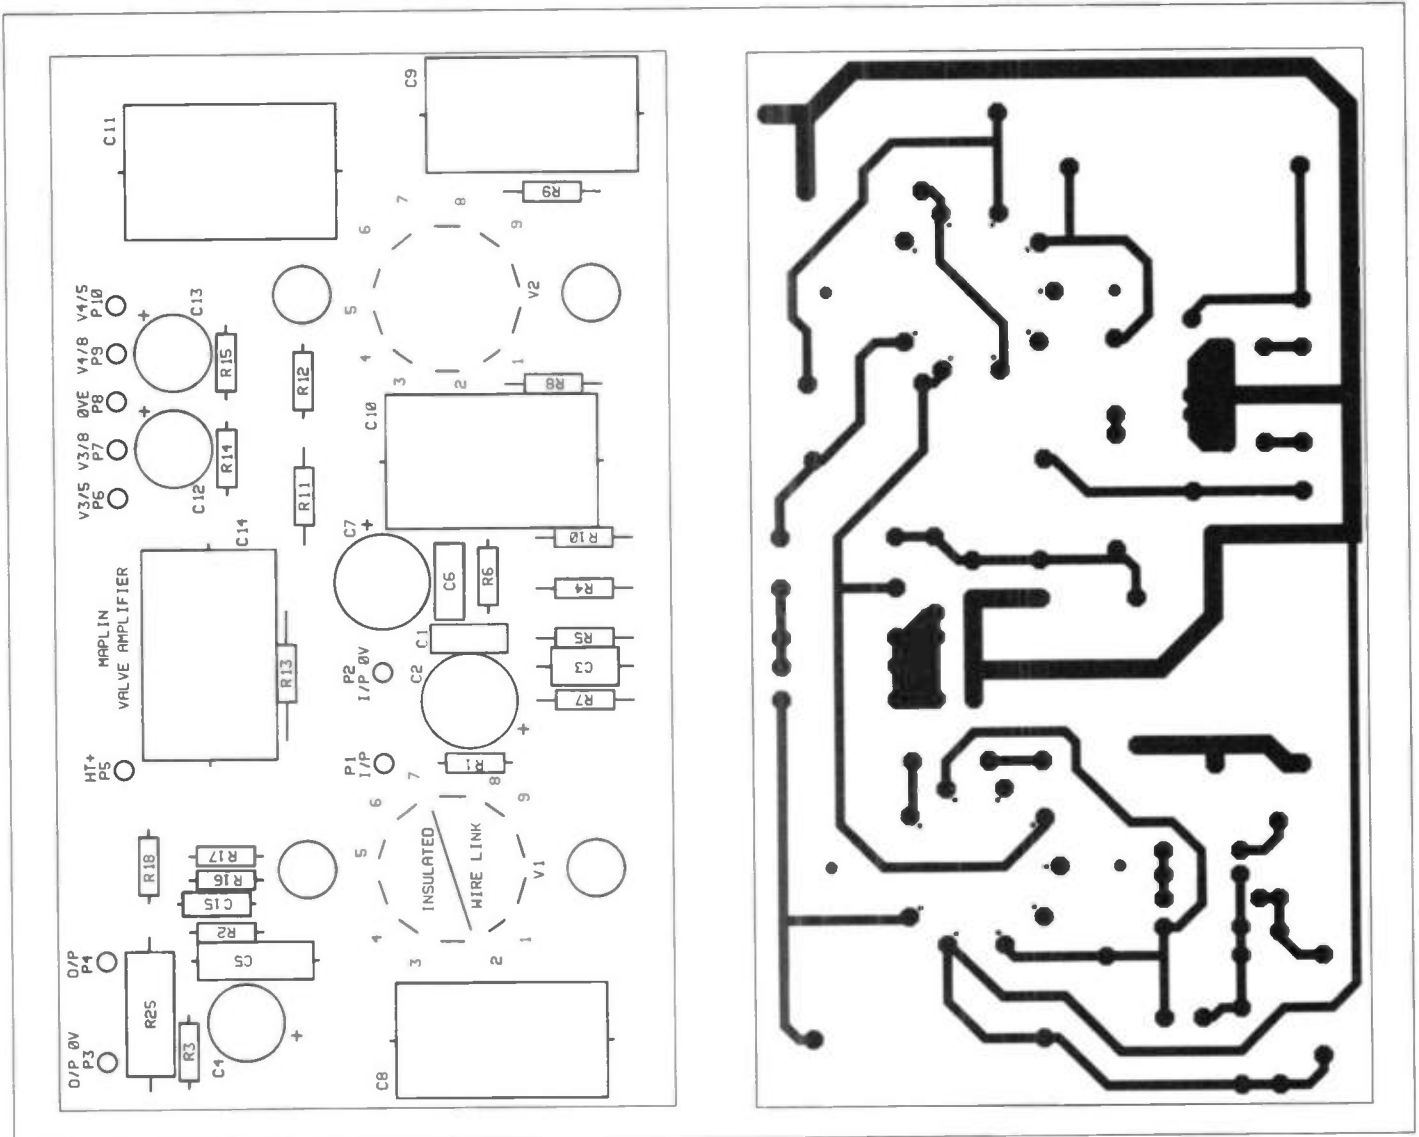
PCB legend and track details. Important Note: for safety reasons the ready-made PCB must be used, since this has a solder resist. PCB track is shown here for information only.
